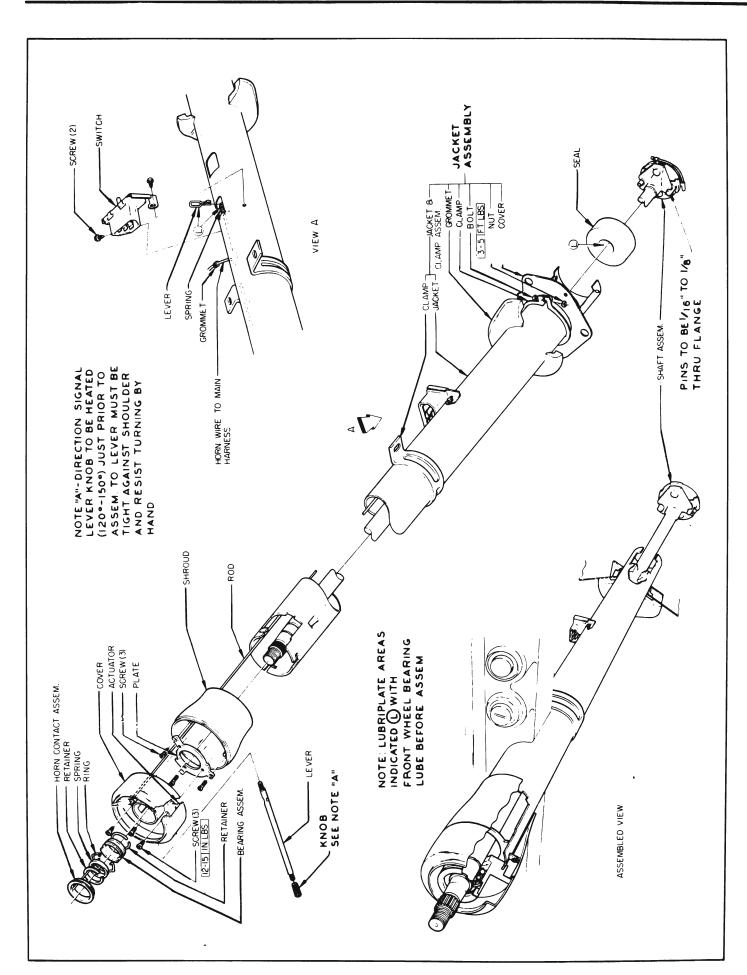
Mast Jacket Assembly - 4 Speed Transmission
